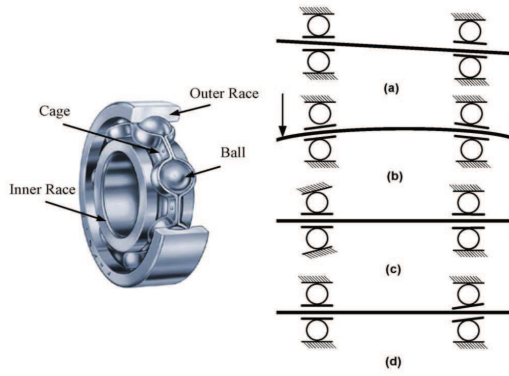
Structure of a rolling-element bearing with four types of bearing misalignment: (a) misalignment (out-of-line), (b) shaft deflection, (c) cocked or tilted outer race and (d) cocked or tilted inner race [45].
